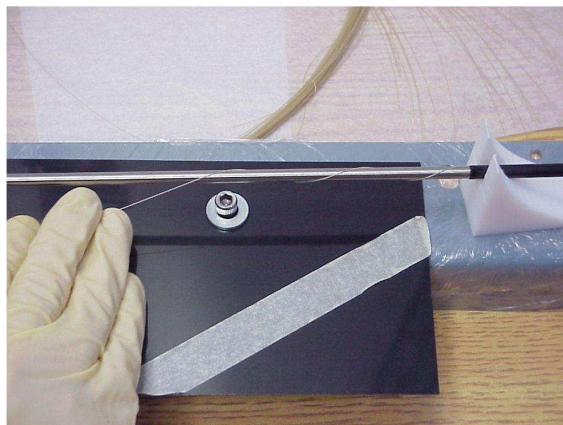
Winding of PEEK fiber on tungsten rod prior to thermo-forming.
